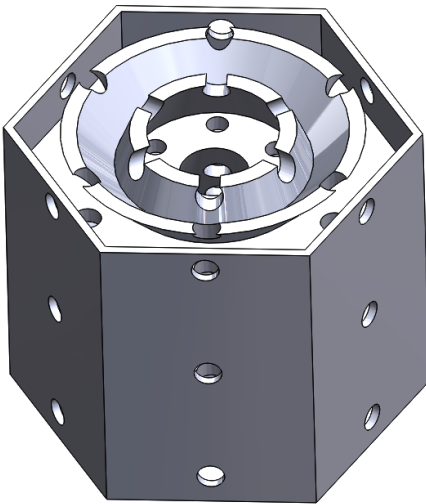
MIMO - Large Cavity AMM Cell - CAD - Horizontal Cross-Section View
